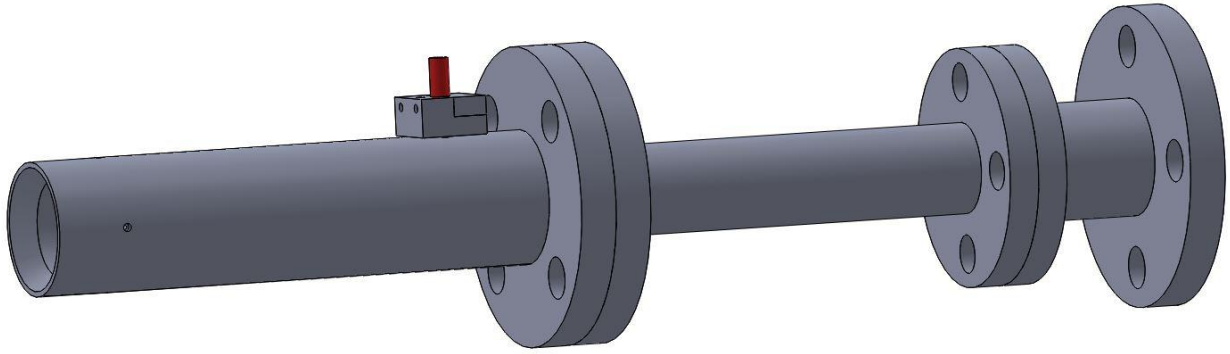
Assembled conical inlet, ejector components and clamp mechanism
